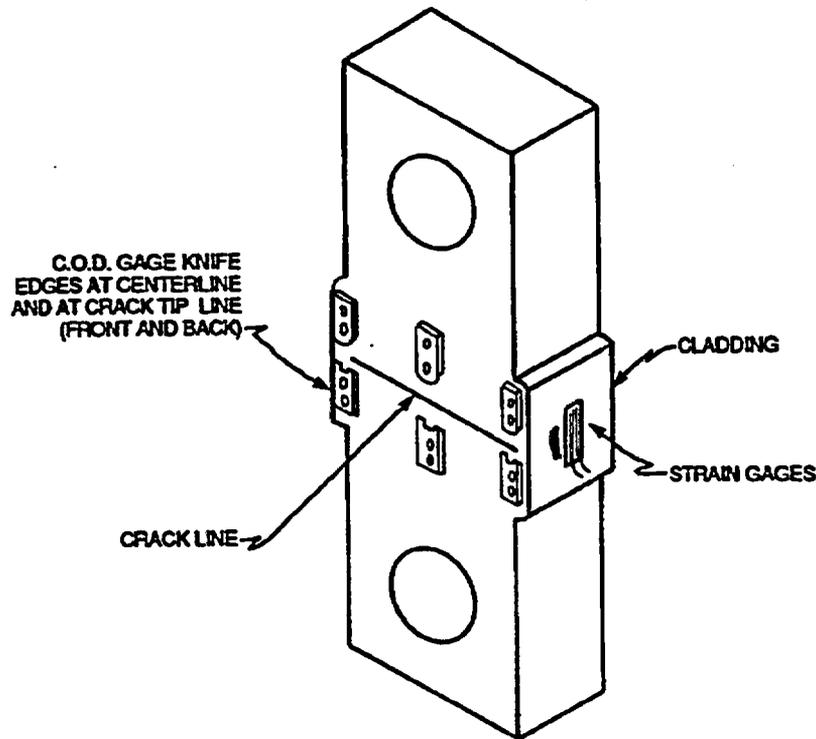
Isometric drawing of Jo-Block specimen used to measure properties of clad layer over subclad flaw.
